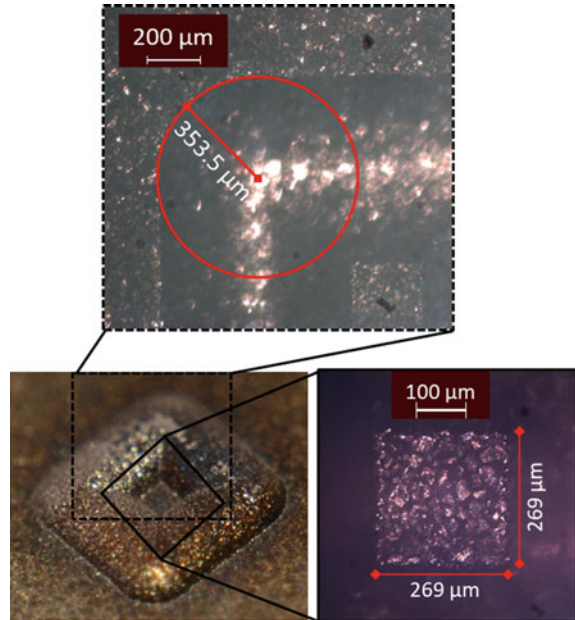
Uniform slot fabricated by ‘to-and-fro’ machining approach
